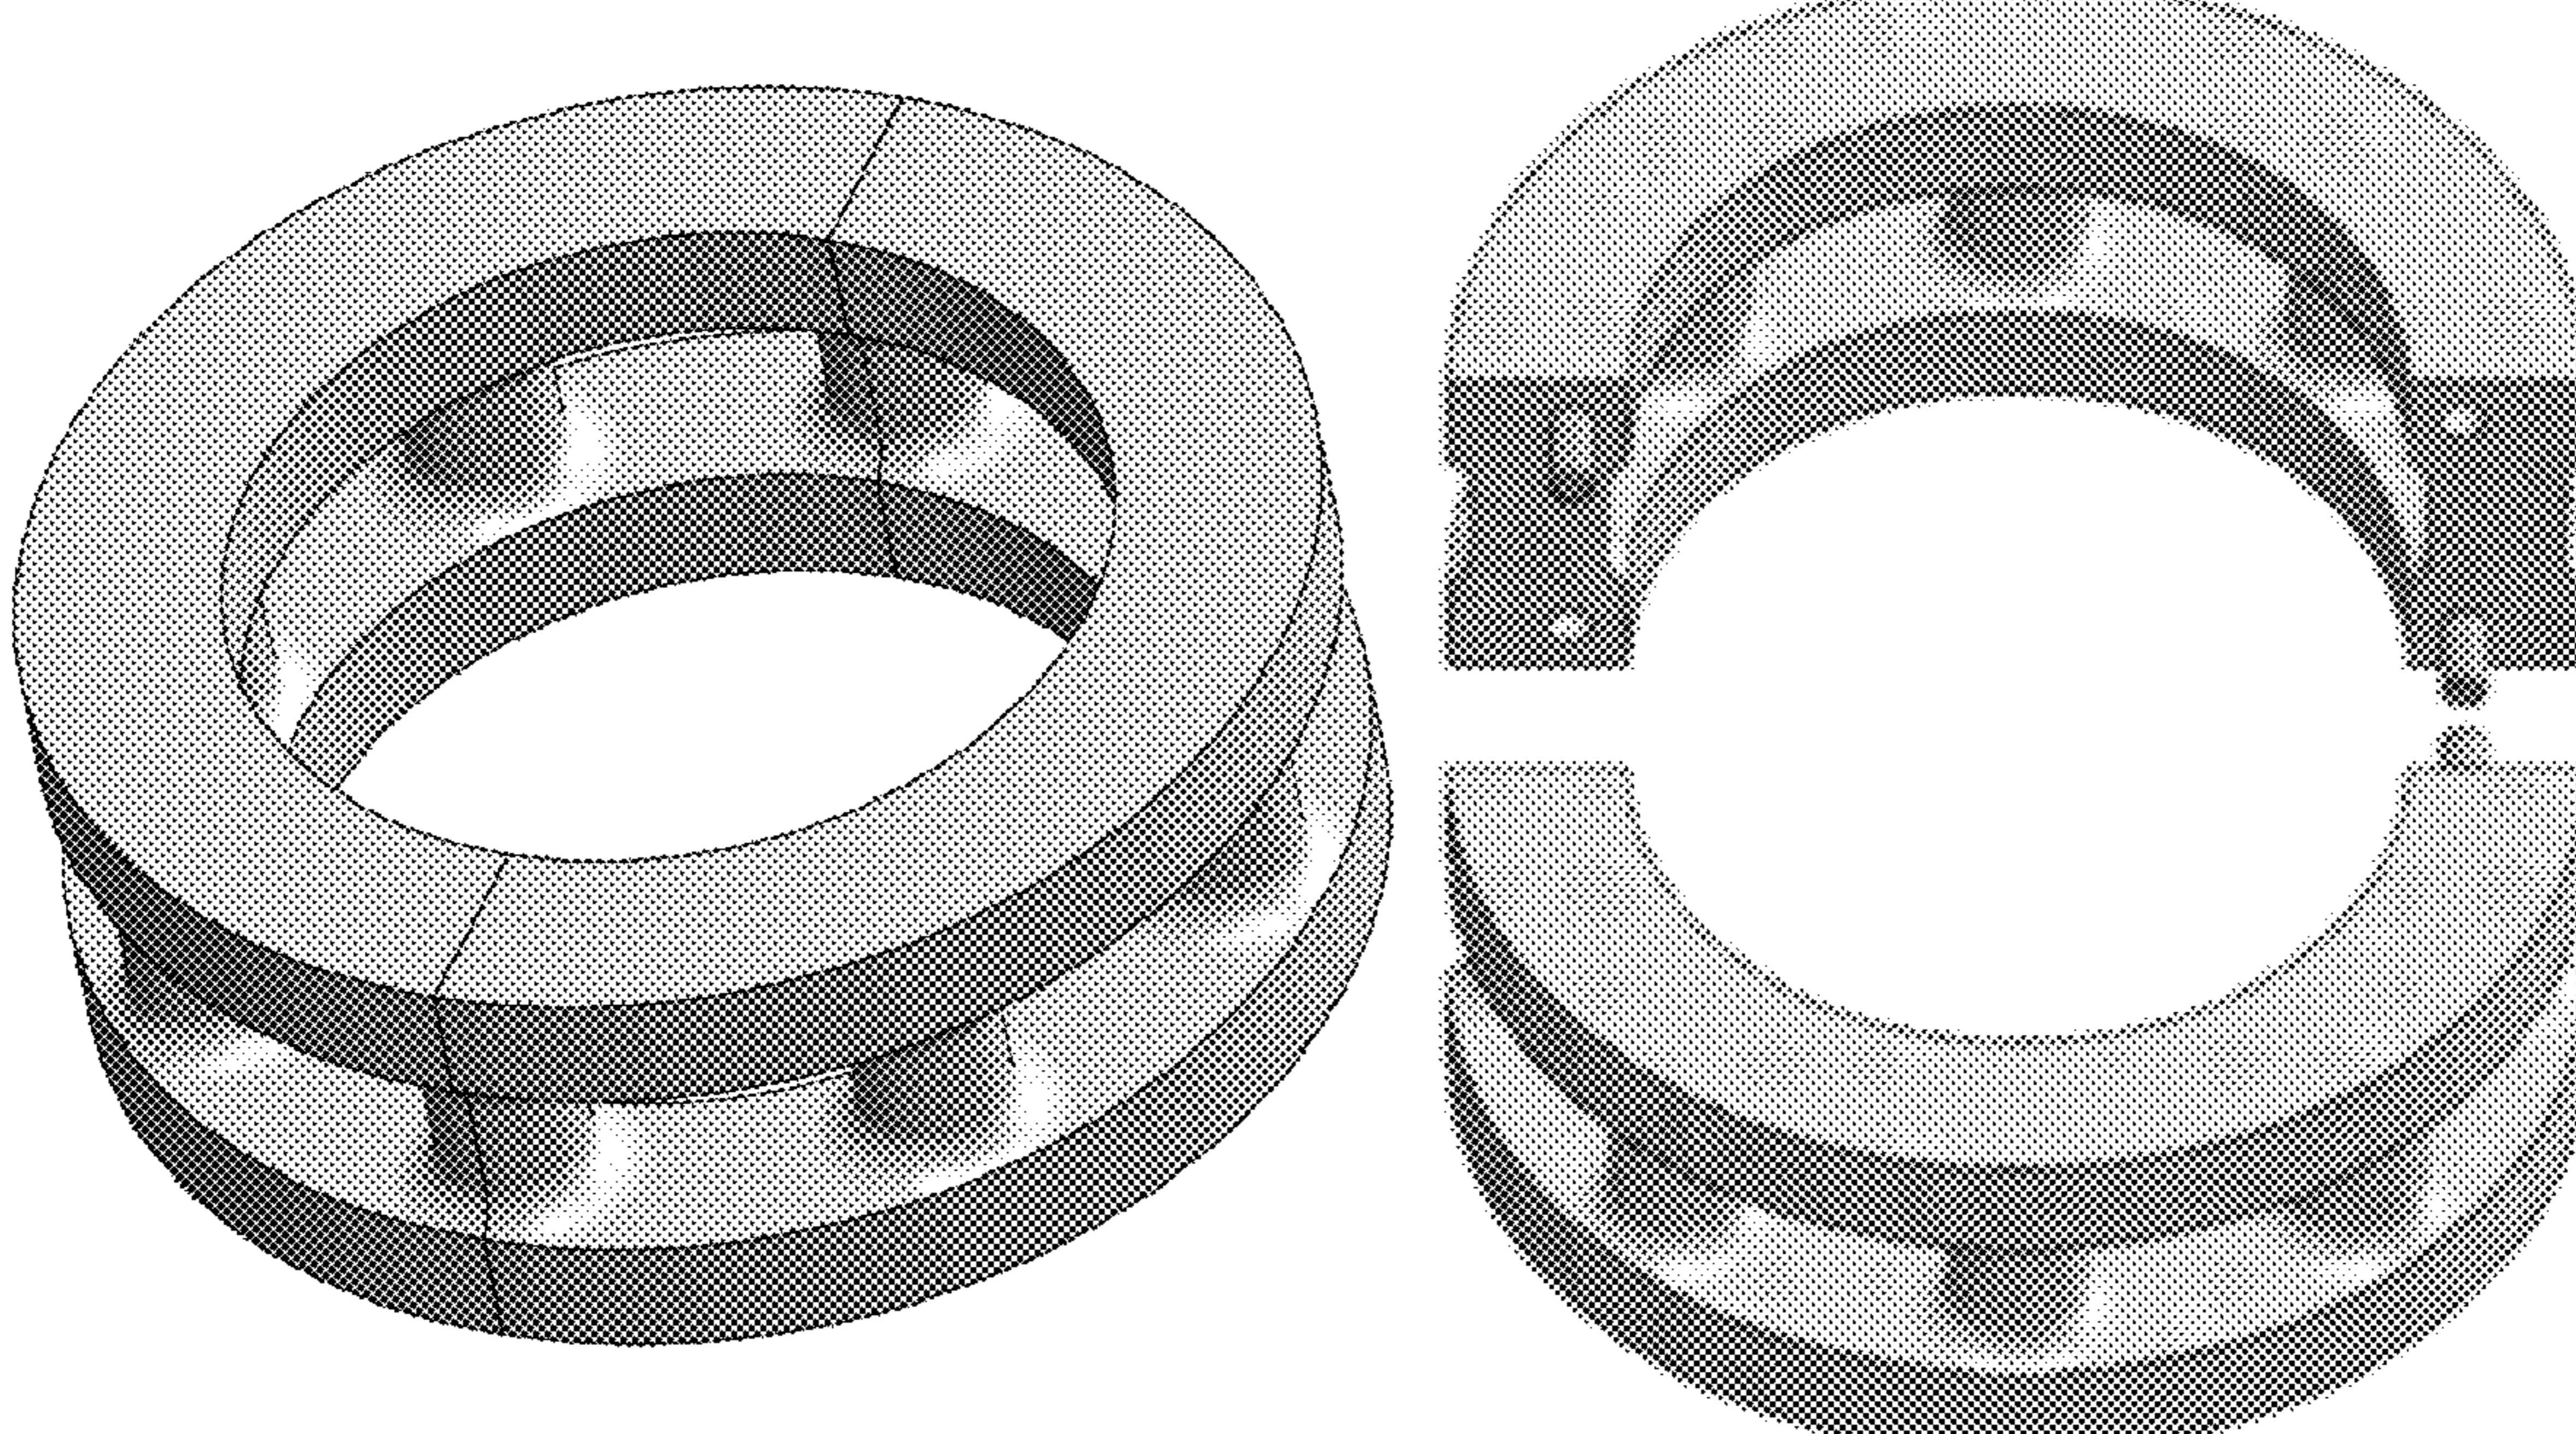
is a top front perspective view of a pillar lantern ring showing my new design; a top rear perspective view; a bottom front and a bottom rear perspective views being identical;
